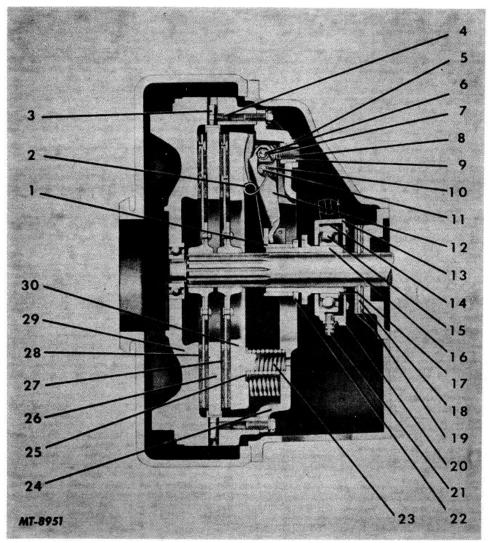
Sectional View of PT Type Clutch (14 Inch Shown)
